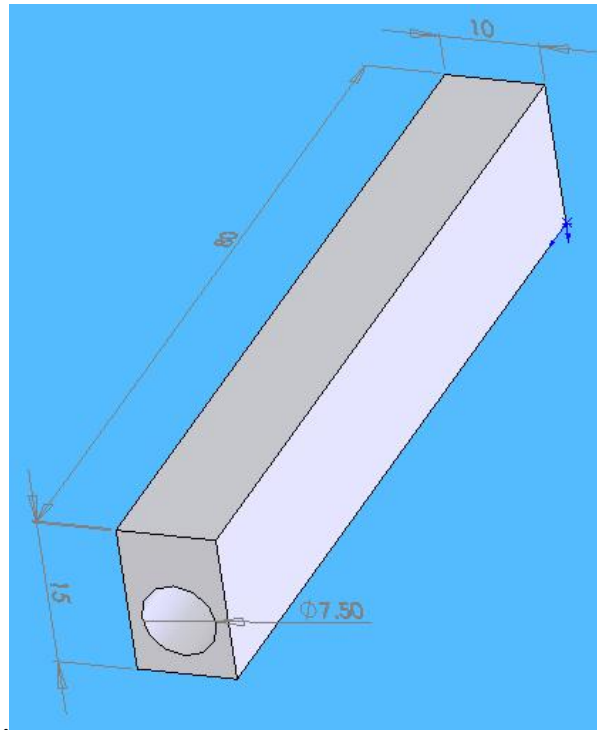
The second step in header fabrication: fluid inlet and outlet holes
